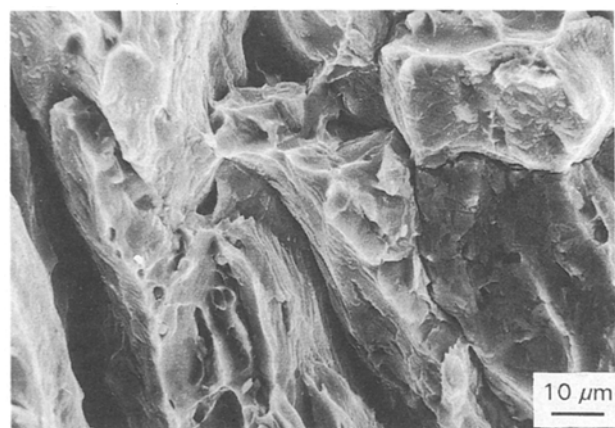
Scanning electron micrograph of tensile fracture surface of the uncharged welds showing secondary cracking.
